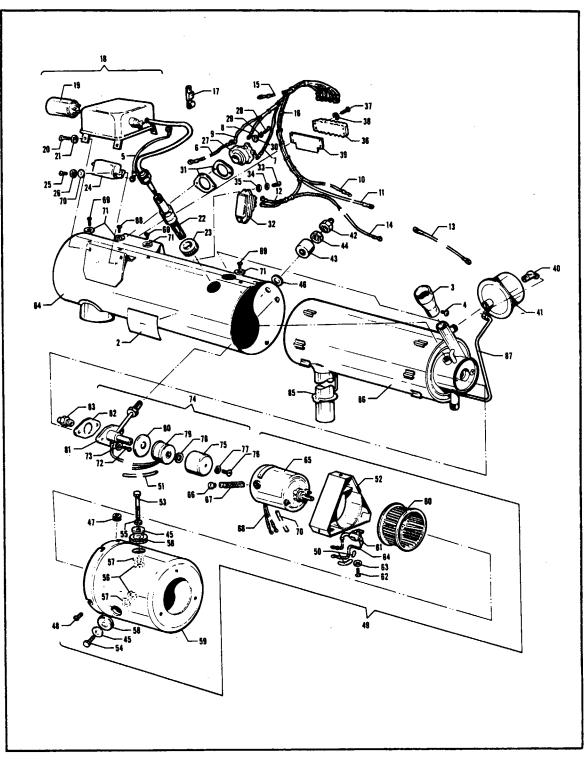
Exploded View of Heater Assembly No. 751 978 (14-volt) and 751 999 (28-volt)
